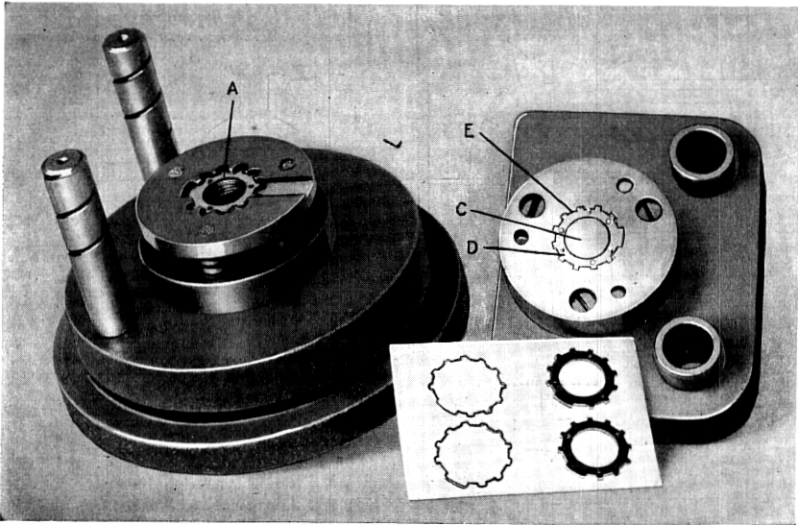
Shaving and perforating punch and die for impulse wheel.
